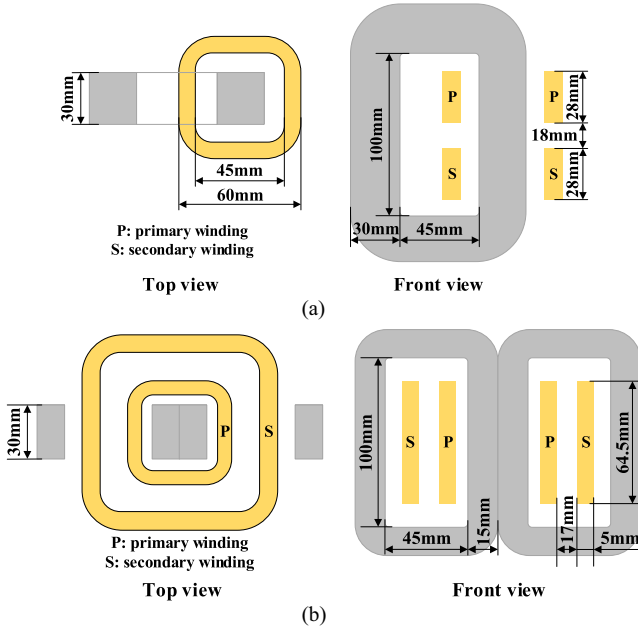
Structures and sizes of (a) HFT prototype with rectangular core and separated windings and (b) HFT prototype with dual-rectangular (EE) core and concentric windings.
